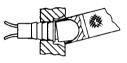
Snapping Cap Off by Moving Tool to One Side
